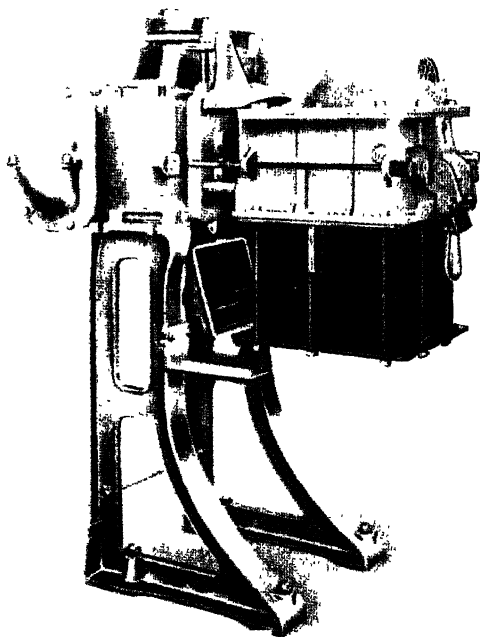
A. PEDESTAL EQUIPMENT, WITH CABLE EARTHING
